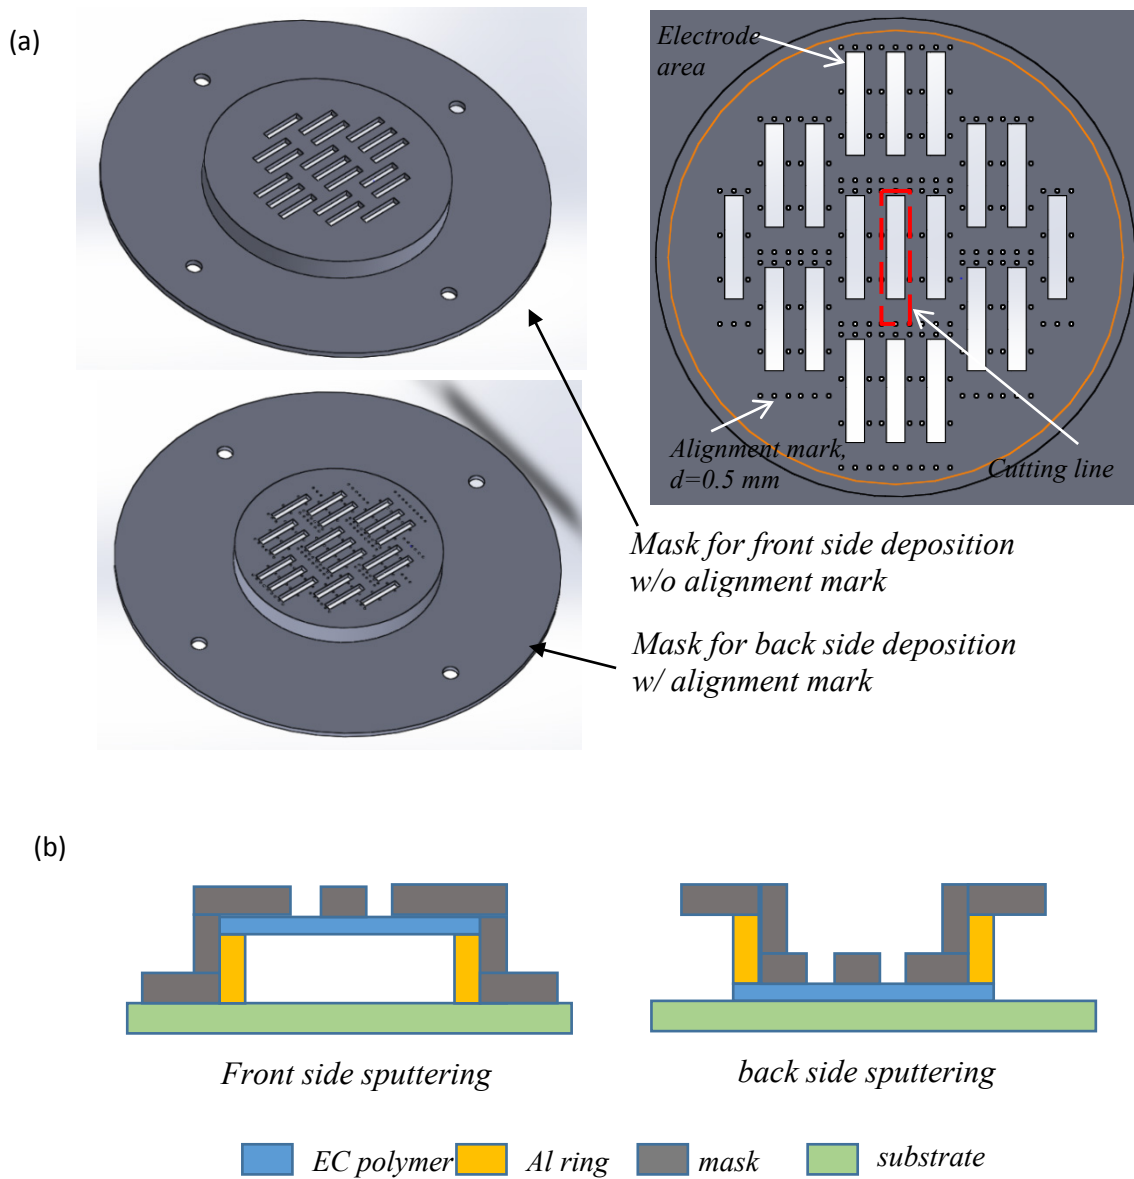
(a) Shadow masks for fabricate the EC terpolymer. The masks have 1.2 cm by 2mm rectangular holes. The small circular holes are designed for alignment during the cutting and assembly. (b) Cross section for EC terpolymer setup. The front side mask is used for front side sputtering, and back side mask is used for back side sputtering
